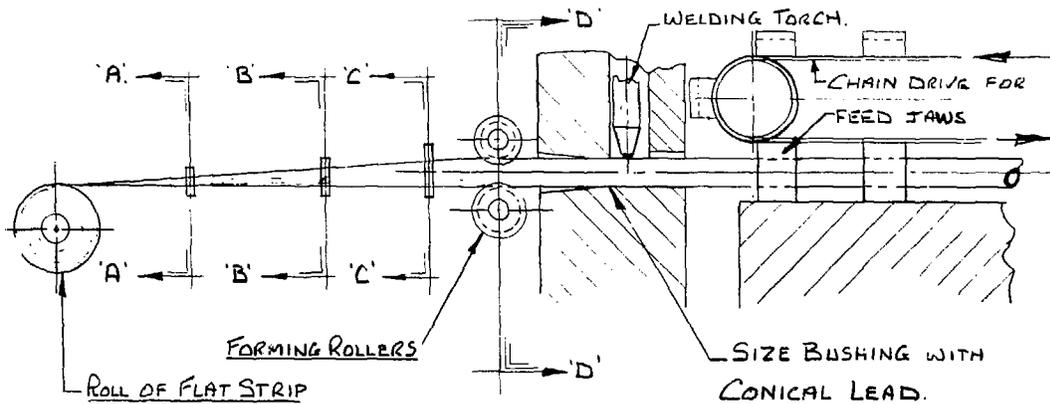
SCHEMATIC OF THE GERMAN MILL TUBE WELDING MACHINE
